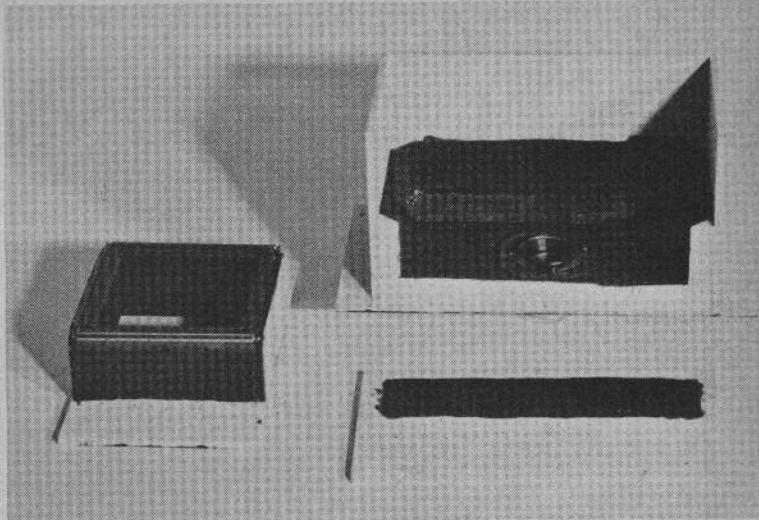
Triangular corner posts added to the lower portion of the camera body, interior surfaces painted black prior final assembly.
